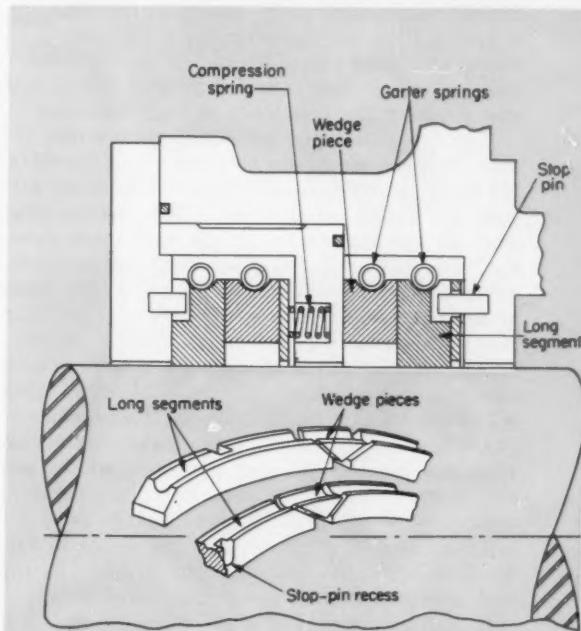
Overlapping segment carbon-ring seal. Multiple coil springs insure initial contact at side faces of rings. Segment joints are open 0.010-0.020 in. when segments are new. As ring wears in, gaps close up and wear is reduced to negligible value.
